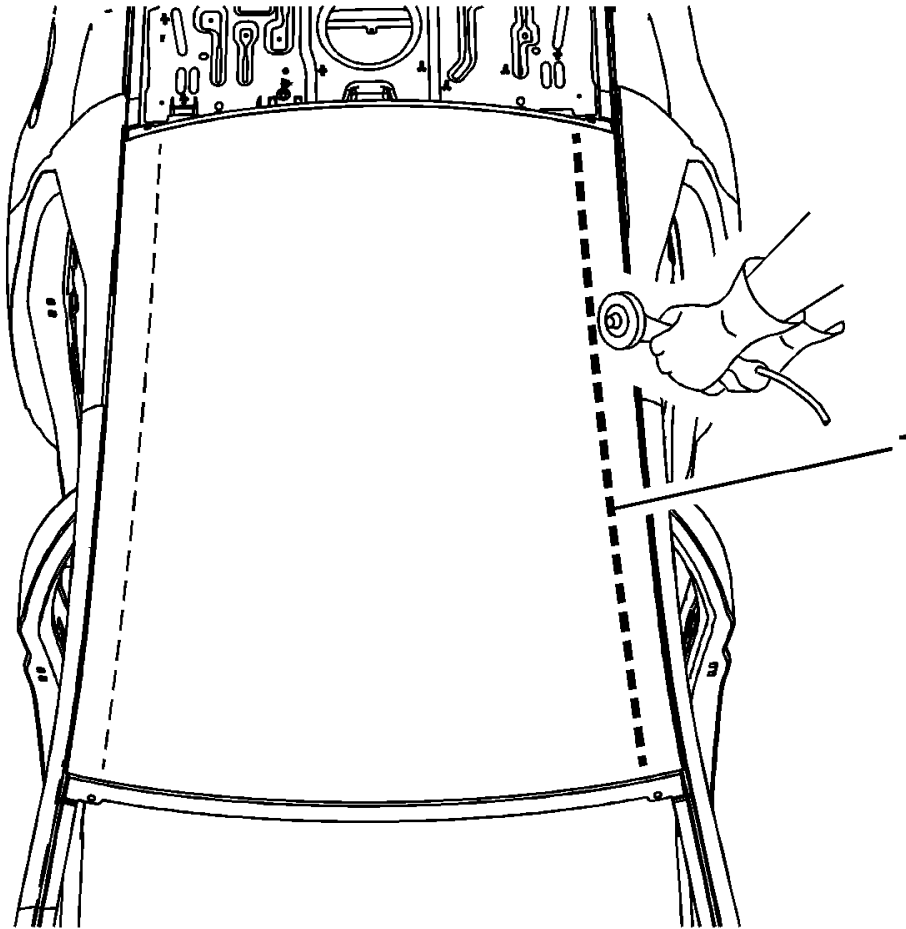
Cutting Panel 30 mm Inboard Of Roof Edge
